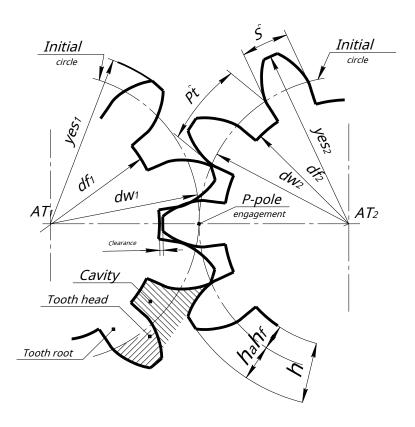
Engagement (*gearing*) pairs of cylindrical wheels
